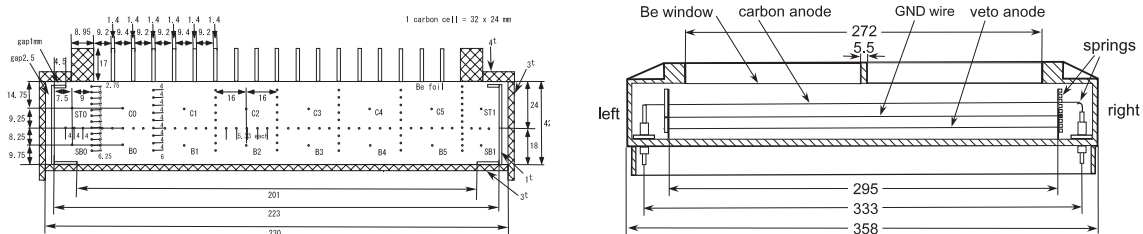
Cross-section views of a proportional counter unit on the perpendicular (left) and parallel (right) to anode wires. Labels C, B, ST and SB of the wires denote Carbon, Bottom, SideTop and Side Bottom. The wires aligning to separate the gas chamber are ground of the counter. The shaded region is chassis of the counter. The unit of numbers is mm.
